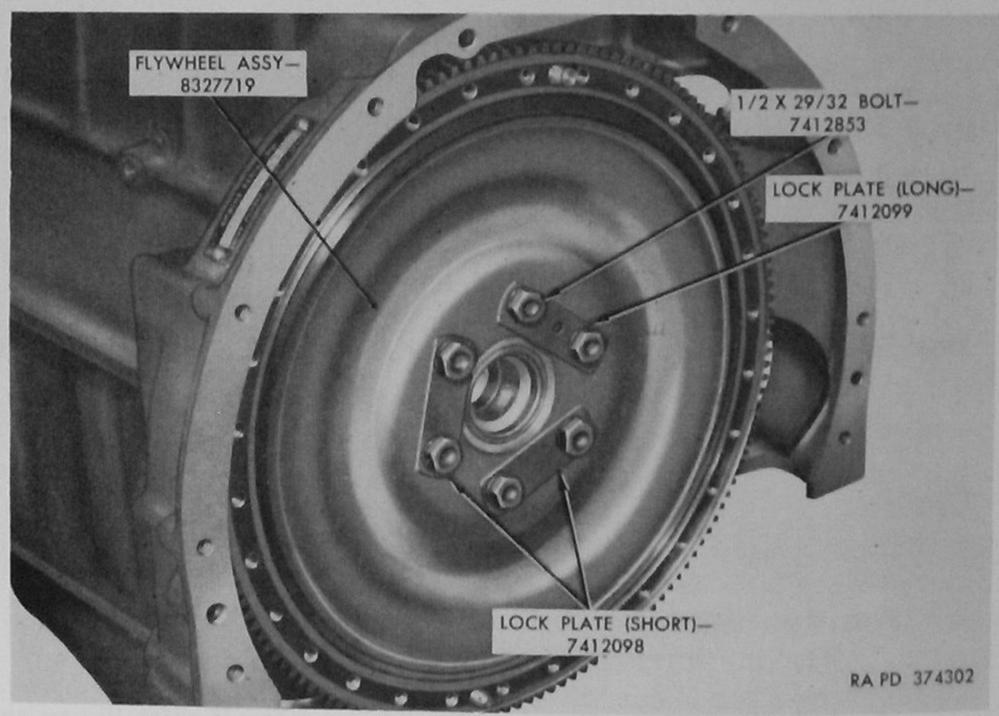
Flywheel installed—engine assemblies 7411599 and 8329440 shown.
